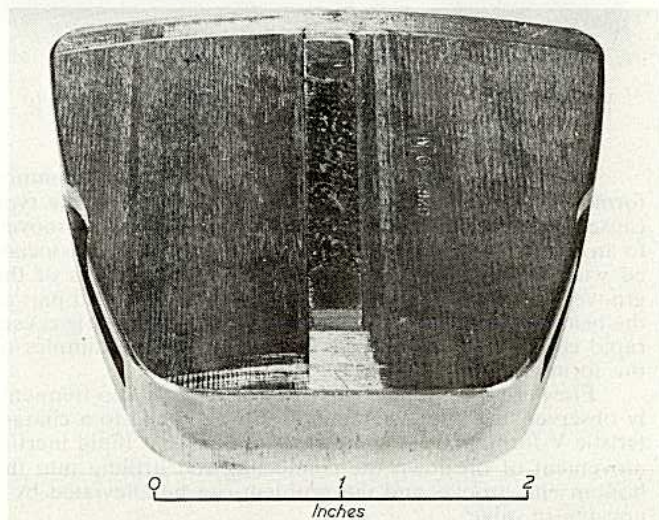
Fretting on thrust pad pivot due to axial vibration
